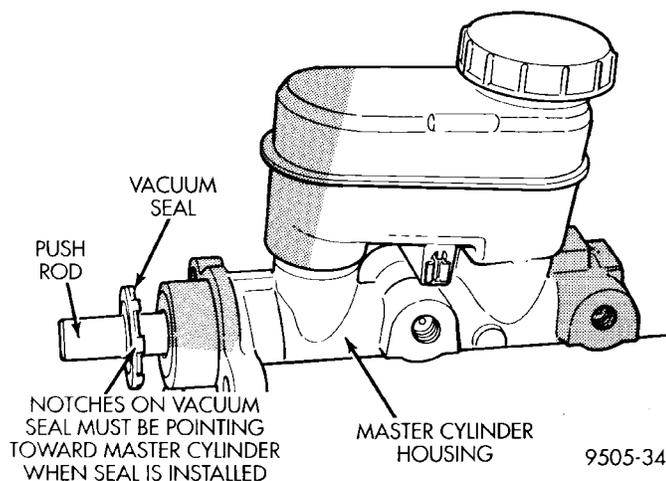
Installing Vacuum Seal On Master Cylinder Push Rod
